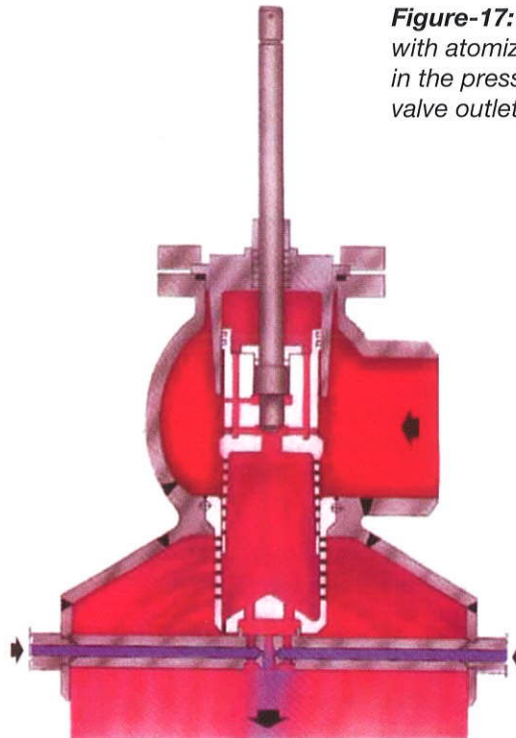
Steam conditioning valve with atomizing nozzle incorporated in the pressure reducing stage at the valve outlet
